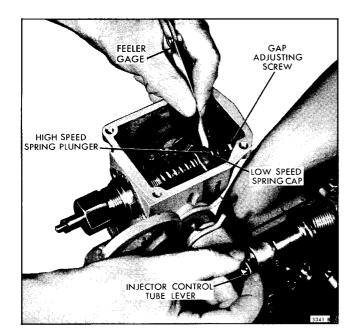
Adjusting Governor Gap - Tool J 3172
